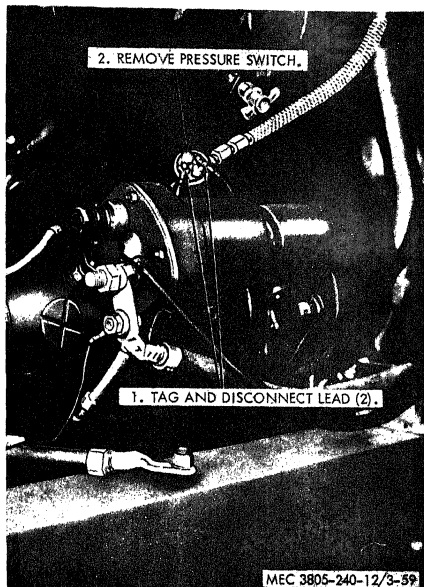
Alternator interlock pressure switch, removal and installation.
